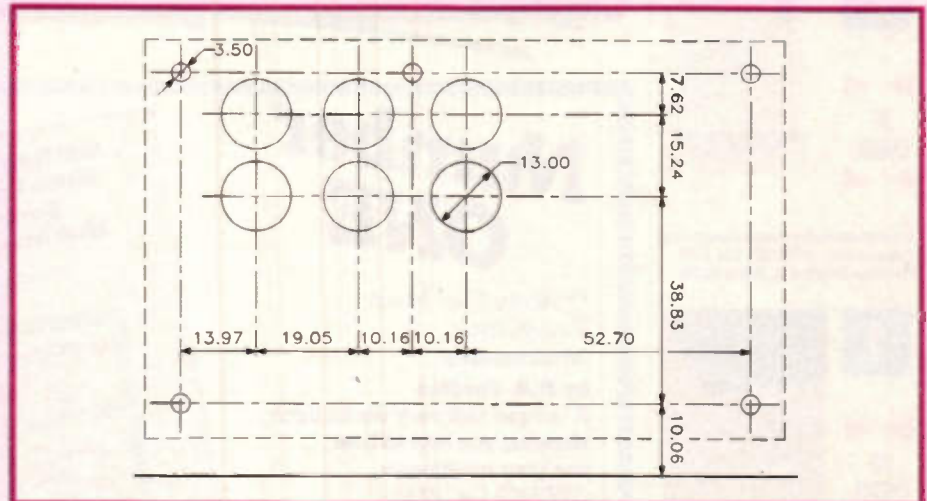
Drilling details for the input/output phono sockets on the rear panel; PCB dimensions shown dotted.
